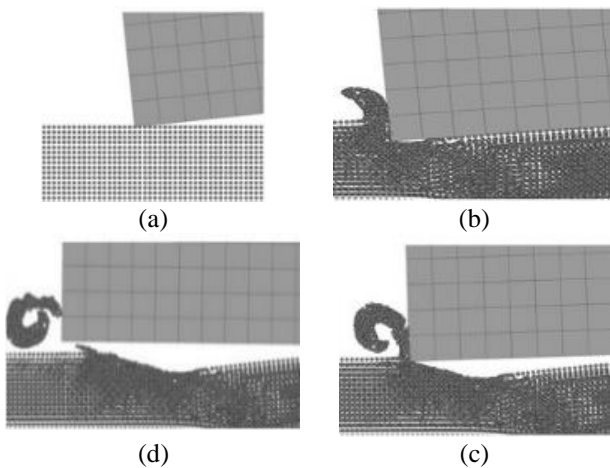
Simulation of chip detachment from the surface of workpiece [71]
